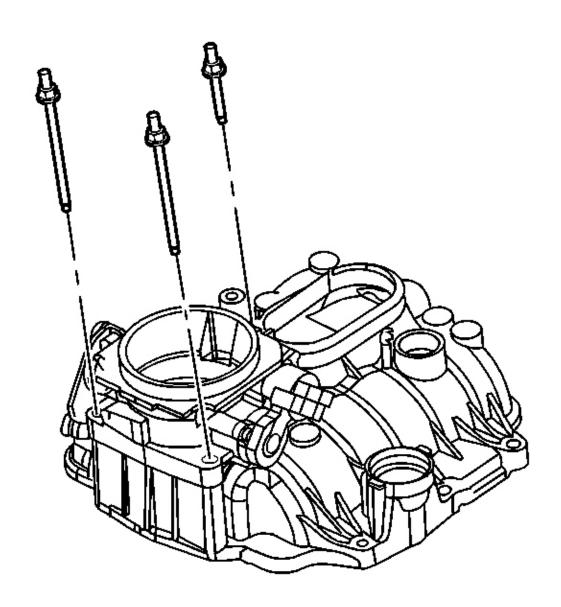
View Of Throttle Body & Attaching Studs Courtesy of GENERAL MOTORS CORP.
